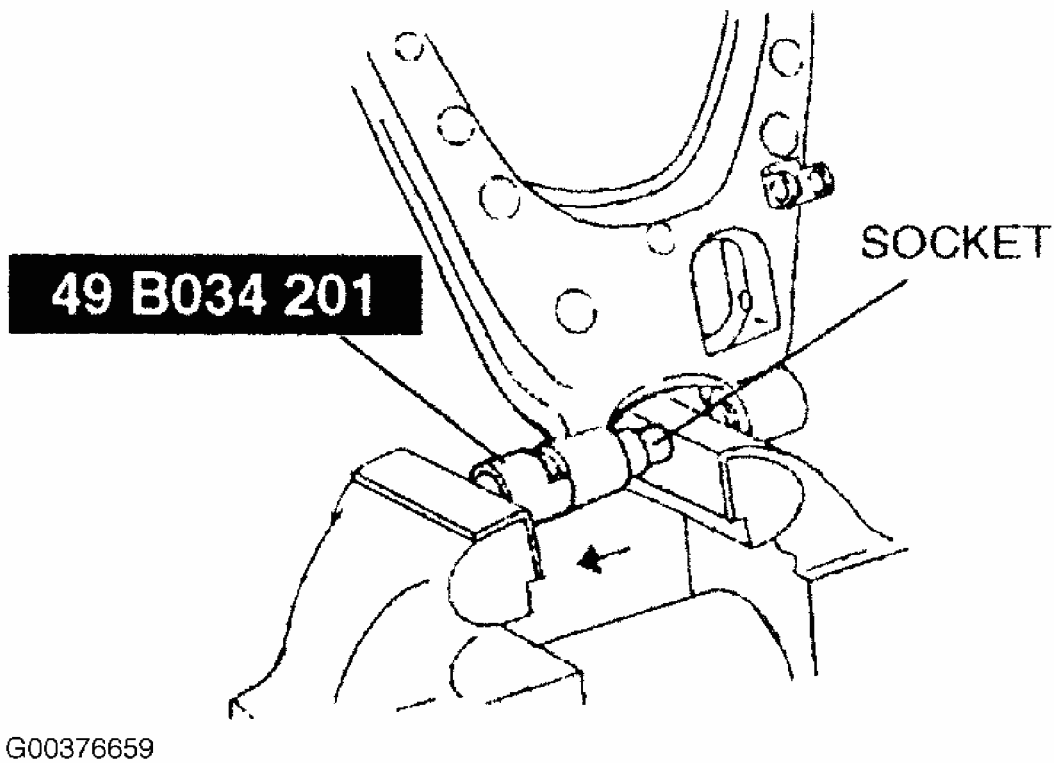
Pressing Out Lower Arm Bushing (Knuckle Side)
